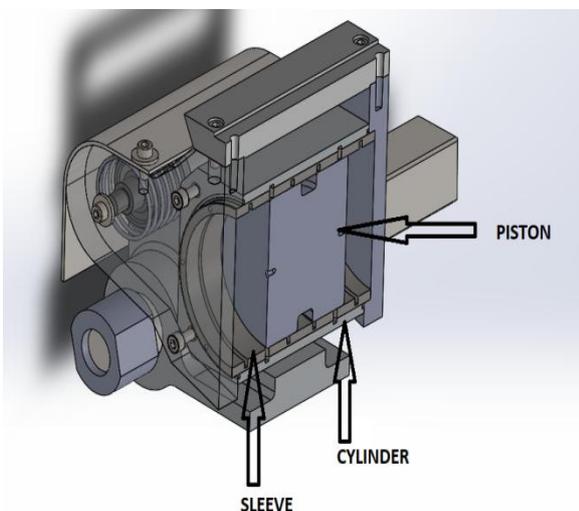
Cut CAD Model of Piston Cylinder and Sleeve Arrangement
